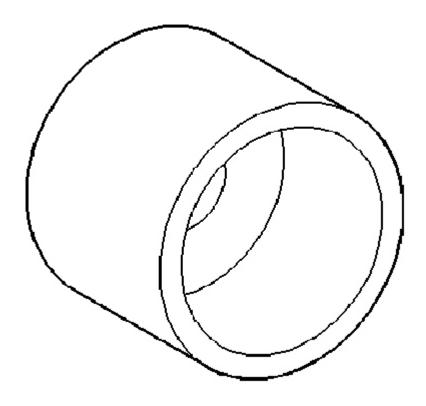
Crankshaft Damper Installer 6792-1 Courtesy of CHRYSLER LLC
